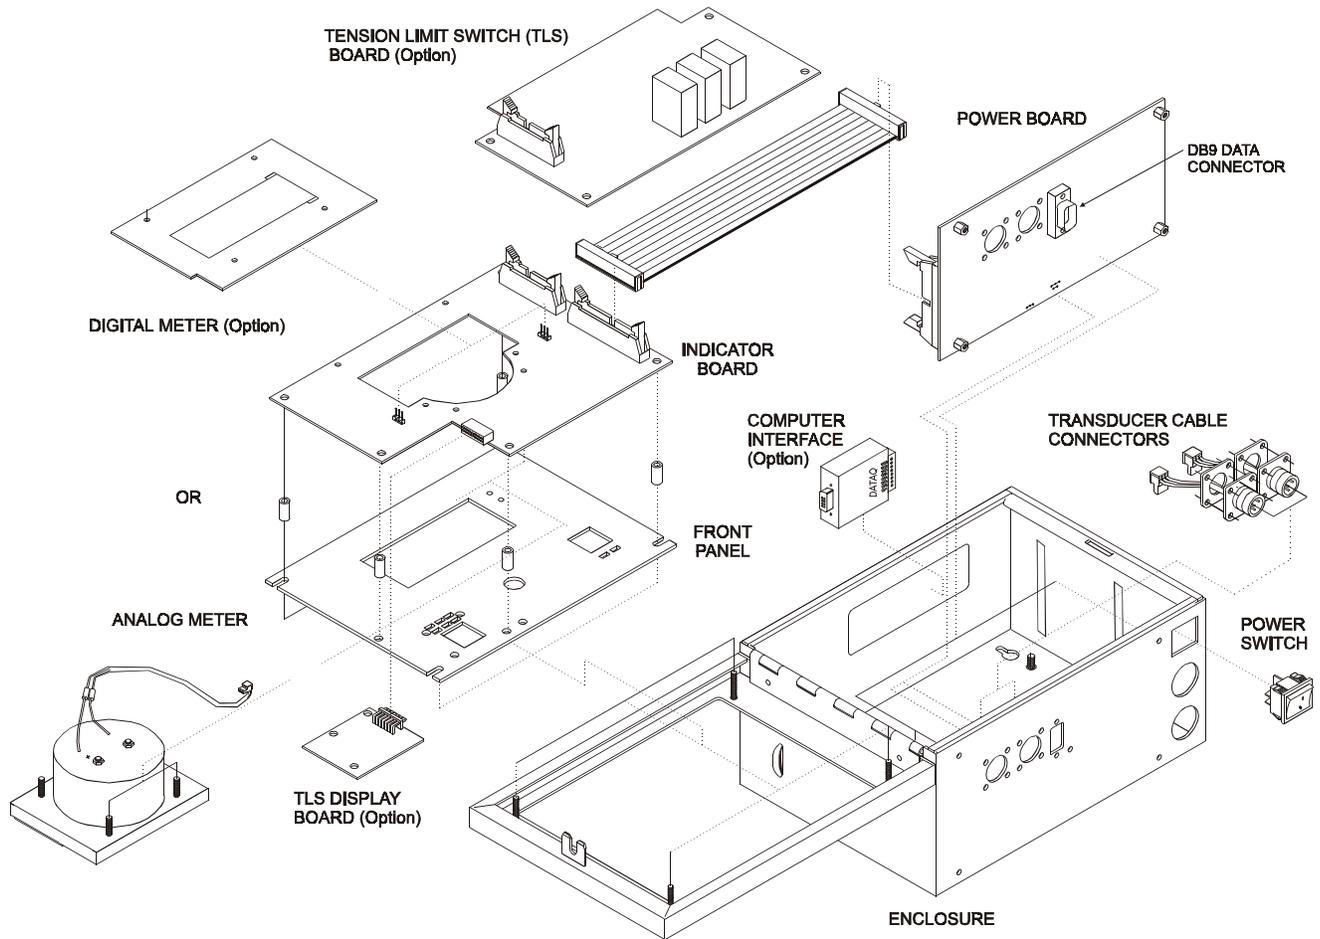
T115 INDICATOR - EXPLODED VIEW
